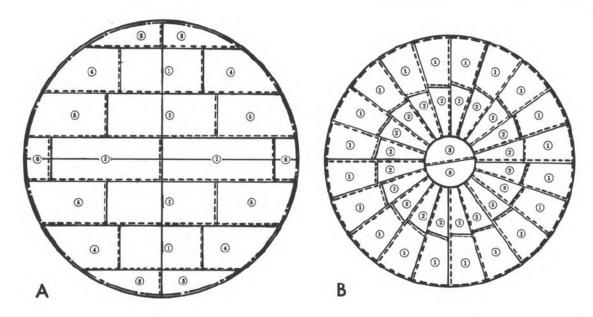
Tank bottoms may be composed of various sized pieces which are joined to form a circular shape.
